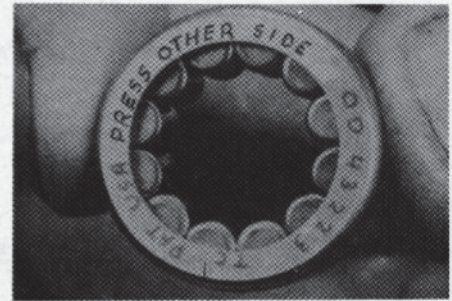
Roller type main bearing used at flywheel end of crankshaft is marked on one side, "PRESS OTHER SIDE". Be sure to observe this precaution when installing bearing in crankcase.
